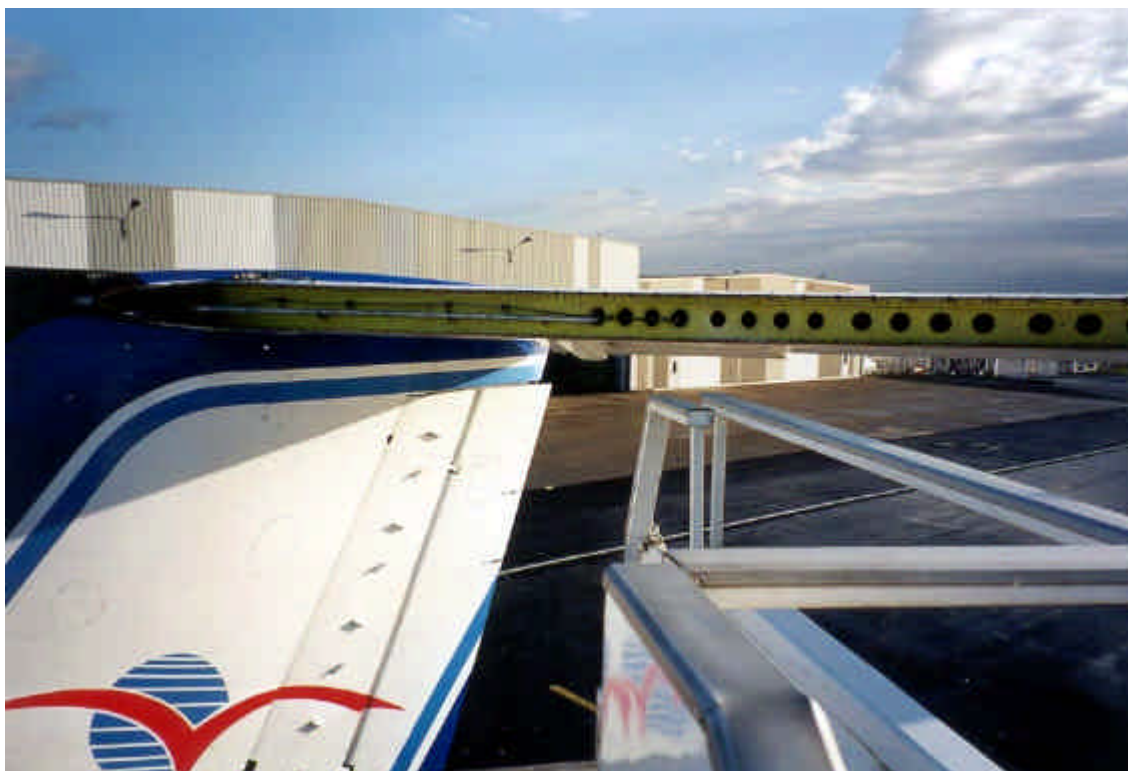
Detail of left leading edge of horizontal stabilizer
